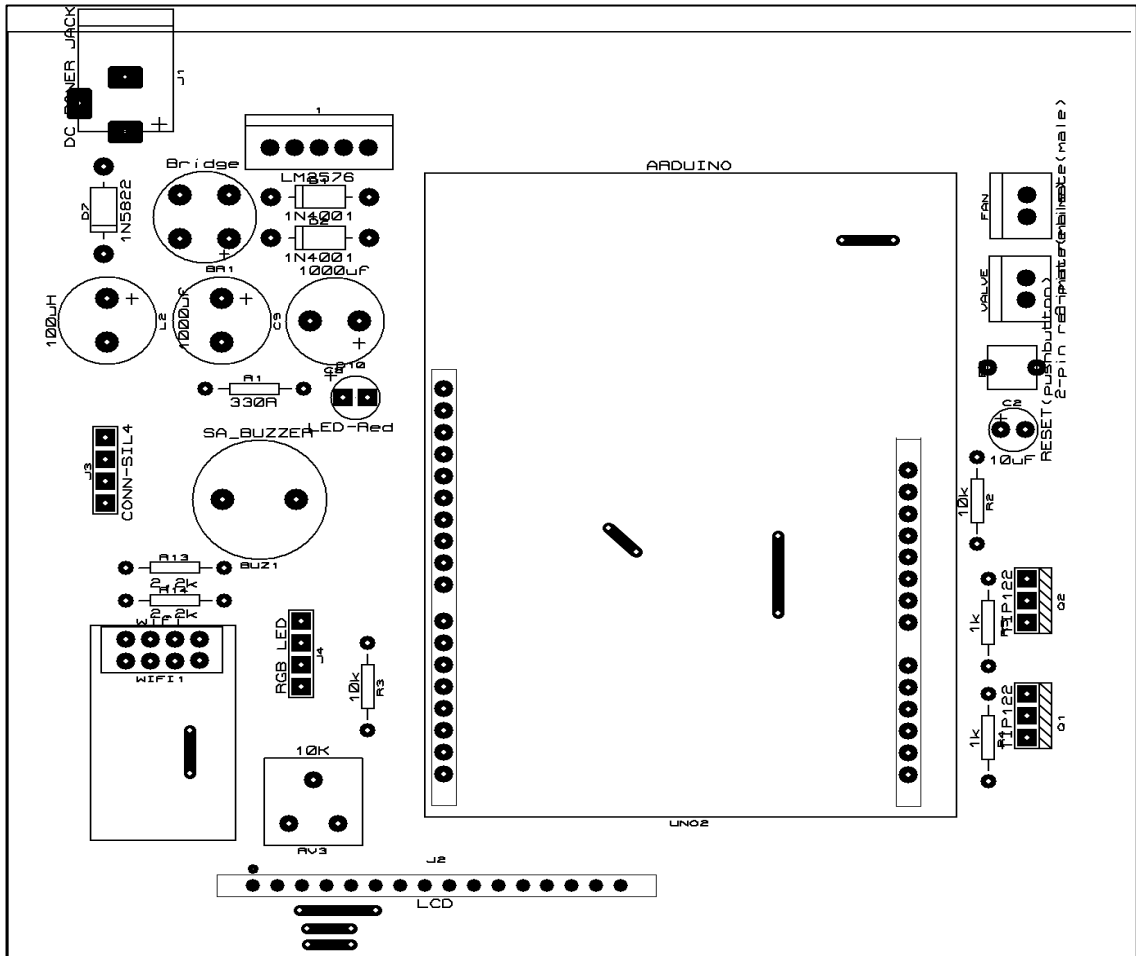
Top view of final PCB layout for with soldered components, matching the prototype logic used in breadboard testing by KGandhi
